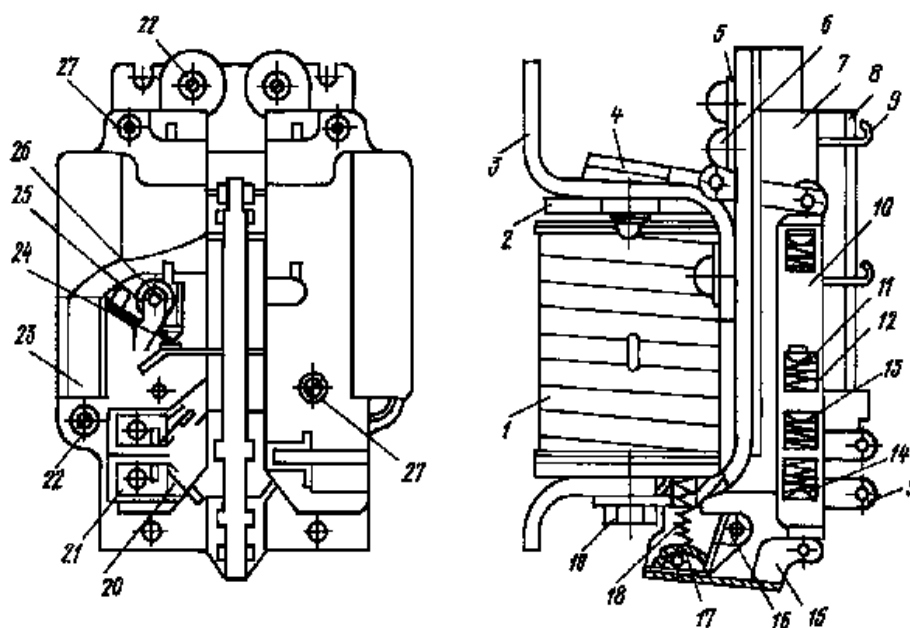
Assembly drawing of the KH 471 electromagnetic DC contactor [53]
